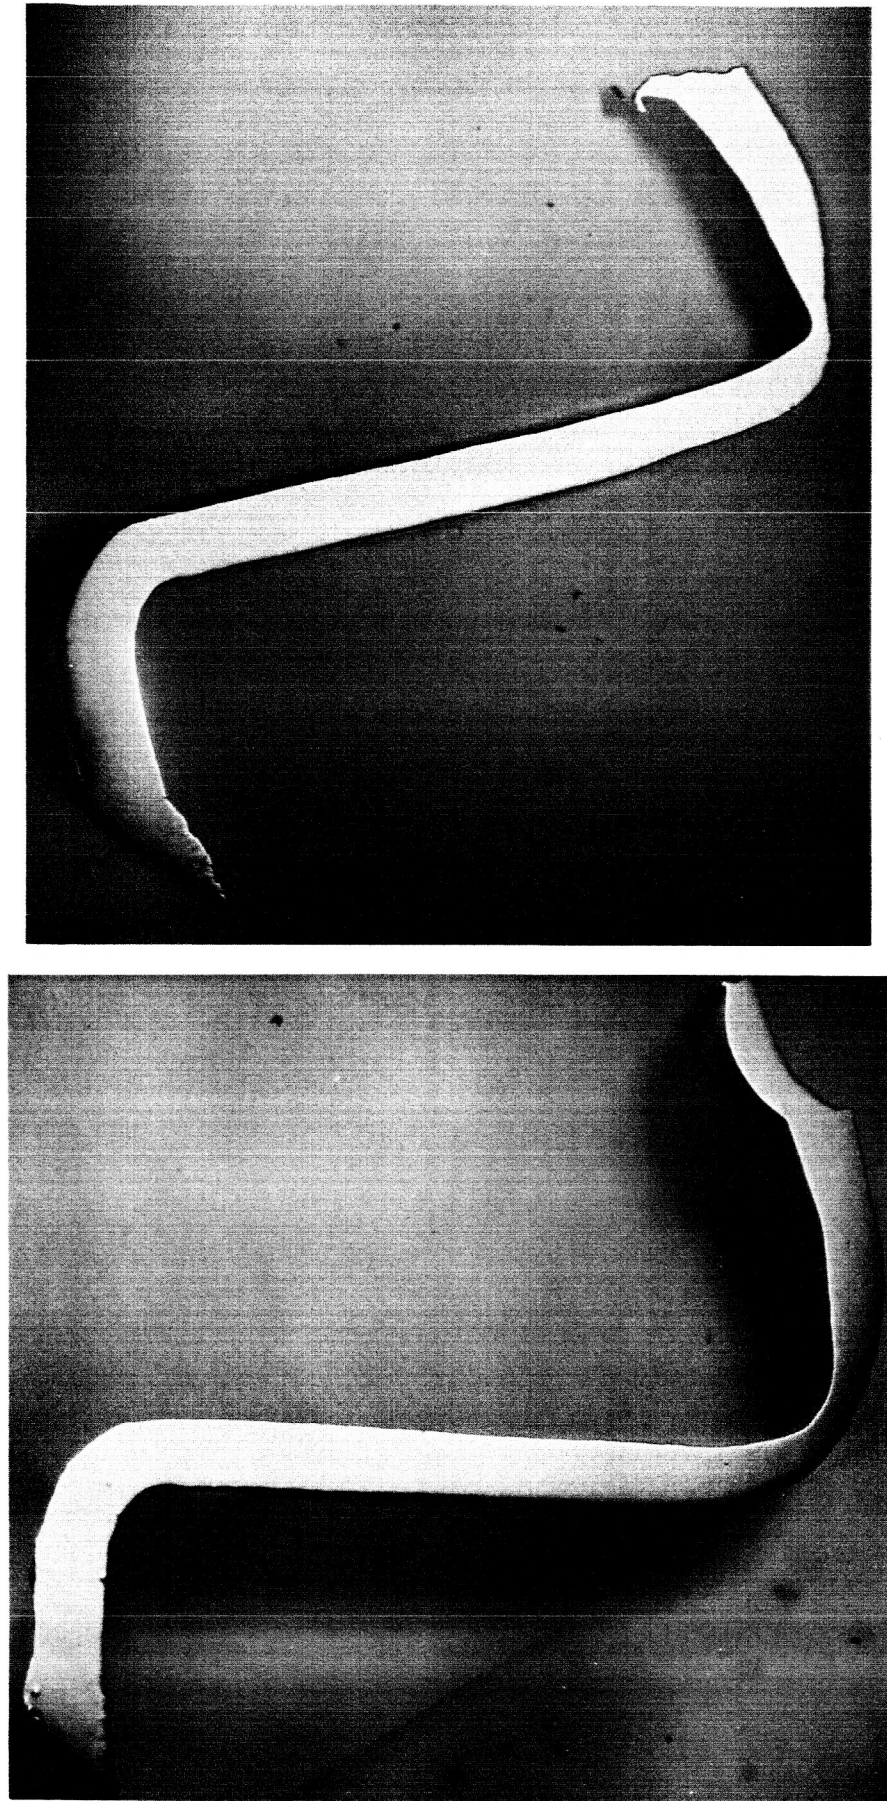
Cross-Sections of End Spinnings on the Ceramic Assemblies at 20X Magnification. Left View is Section of Top Spinning Attached to Bellows End of Capsule Showing that Original .020" Material was Reduced to Approximately 0.009" at Bend Near Weld. Right View is Section of Spinning at Lower End of Ceramic Assembly Showing that Thickness was Reduced to Approximately 0.005" at Bend Near Weld to Bottom Rodar Disk and Flange.
